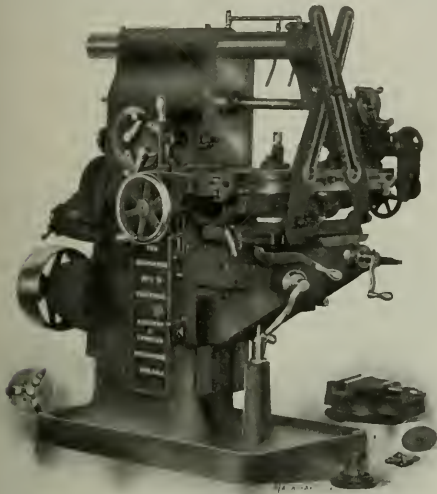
Milwaukee Gear-driven Universal Milling Machine.
